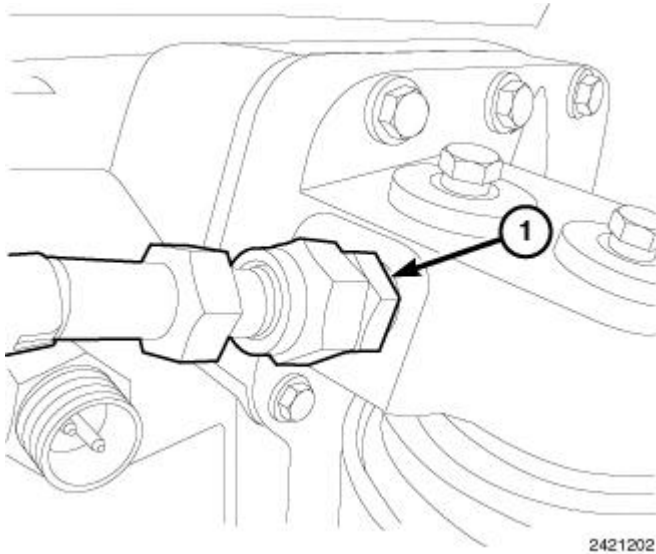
Identifying Turbocharger Oil Supply Line At Oil Cooler Housing
